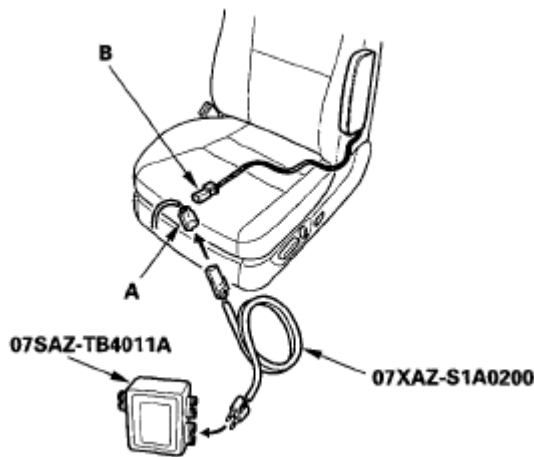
Identifying Left Side Wire Harness 2P Connector And Driver's Side Airbag
